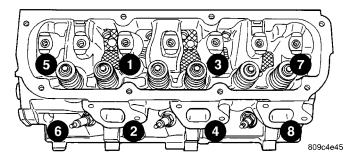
CYLINDER HEAD TIGHTENING SEQUENCE
